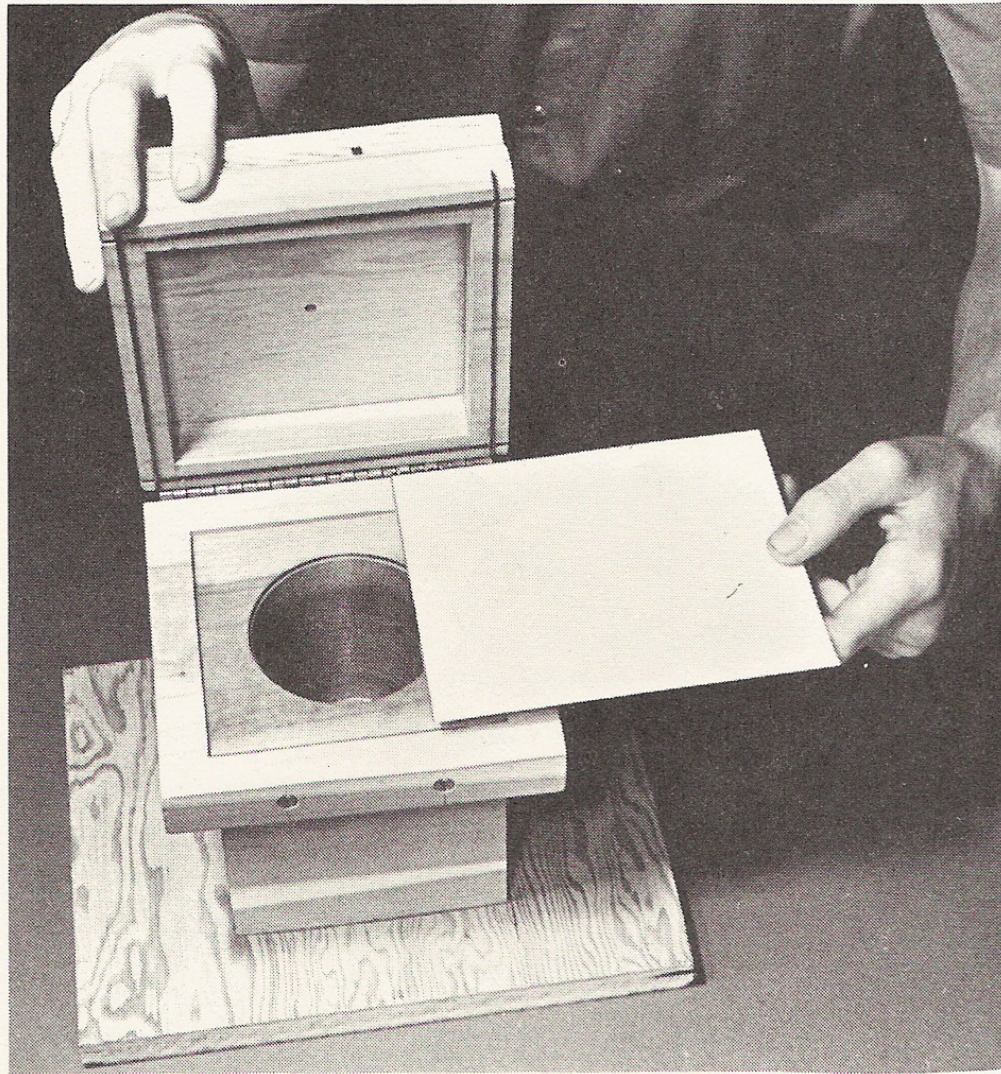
This pressure forming mold has a hinged cover with narrow strips of band saw blade placed along the edge to firmly grip the hot plastic sheet.
